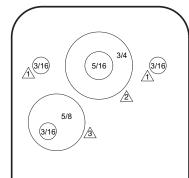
The Mounting Screws hold the Setting Indicator and Controller in place.
